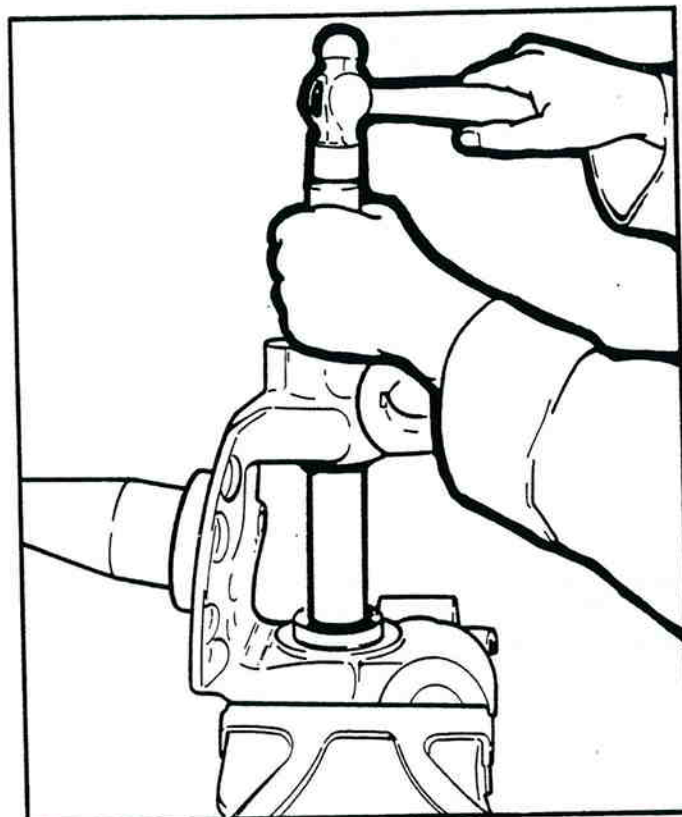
Installation of Grease Seal (Bronze or "Easy Steer" Bushed Knuckles).
